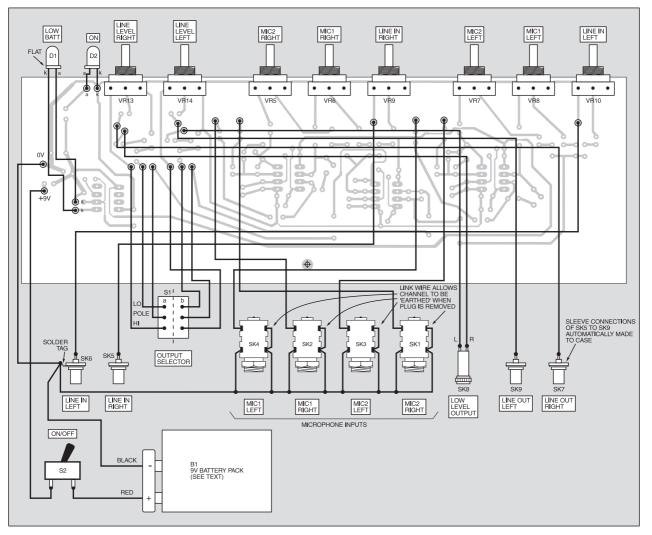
Interwiring from the circuit board to the front and rear panel mounted components. The general positioning of components within the metal case can be seen in the photographs.
